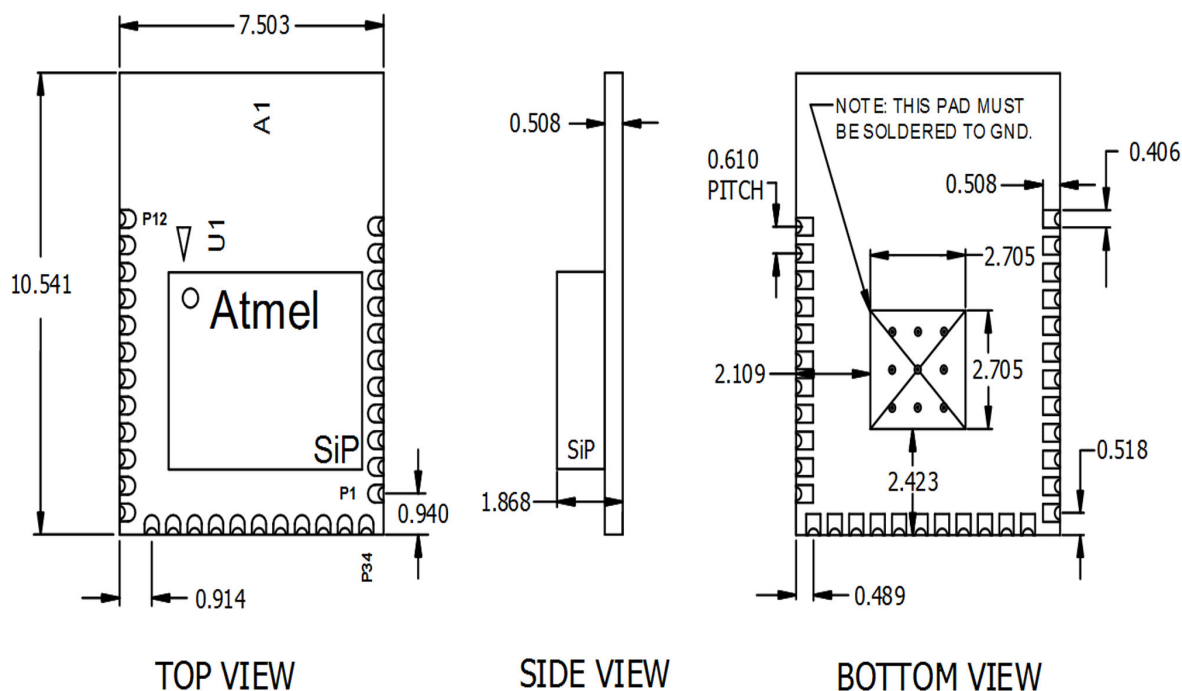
ATBTLC1000-XR1100A Package Outline Drawing
